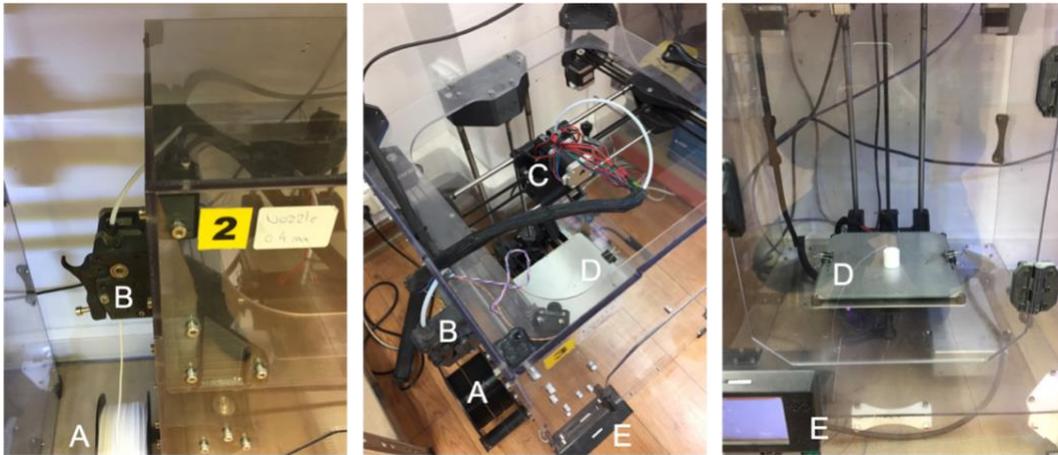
3D printing experimental testing set-up. All images show different perspectives of the 3D printers that were used. A - filament spool; B - small gear that pushes the filament back and forth; C - extruder head; D - build platform; E - control panel.
